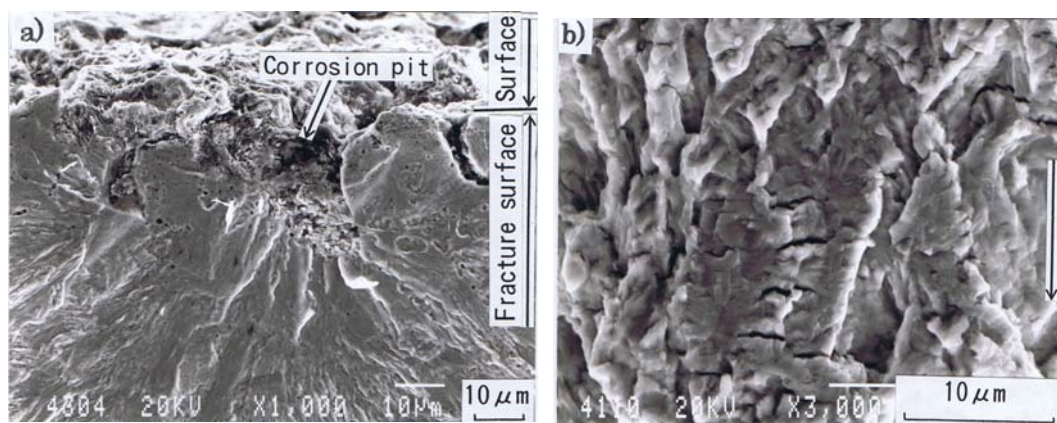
Corrosion fatigue fracture surface of 17-4pH T type welded joint in humid air(353K, 90% relative humidity) containing 5000ppm H<sub>2</sub>S gas [Ebara et al.[26]].
